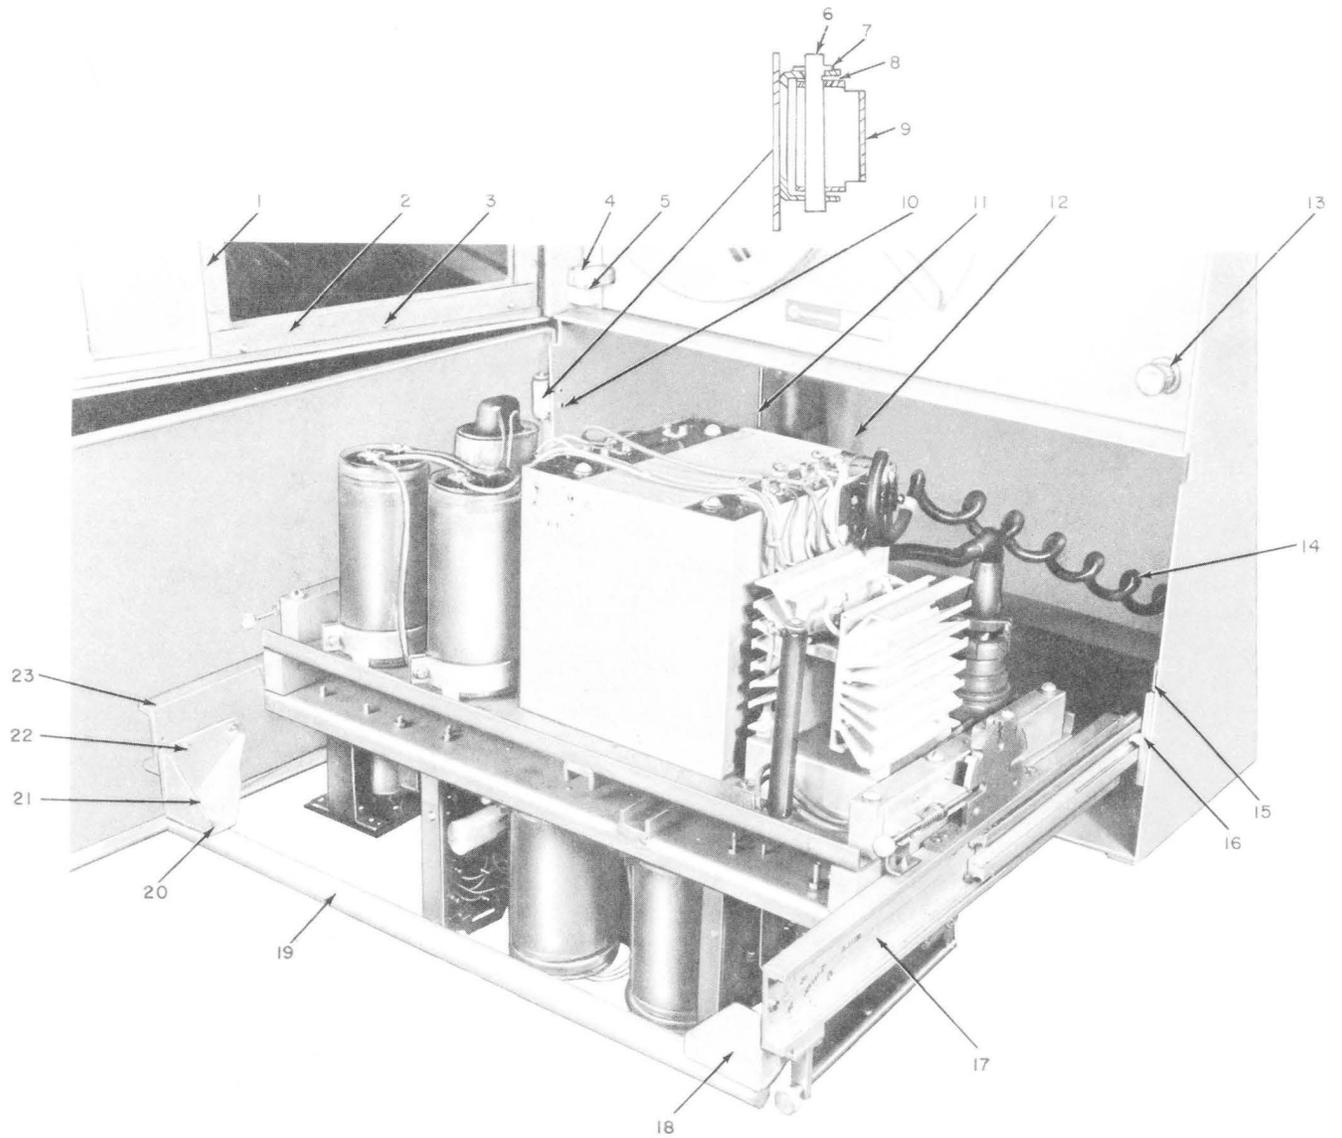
Partial View of Cover Door Inside With Power Supply Cover Door and Rack (KS-20573 L1 Rectifier Shown Installed)
